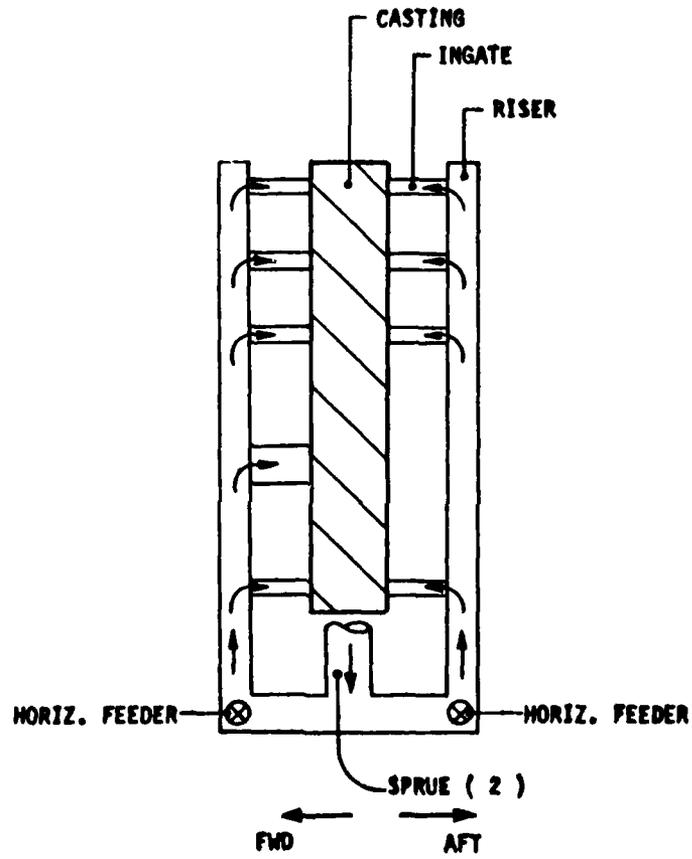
POURING SYSTEM BOEING PART A AND B CASTINGS
